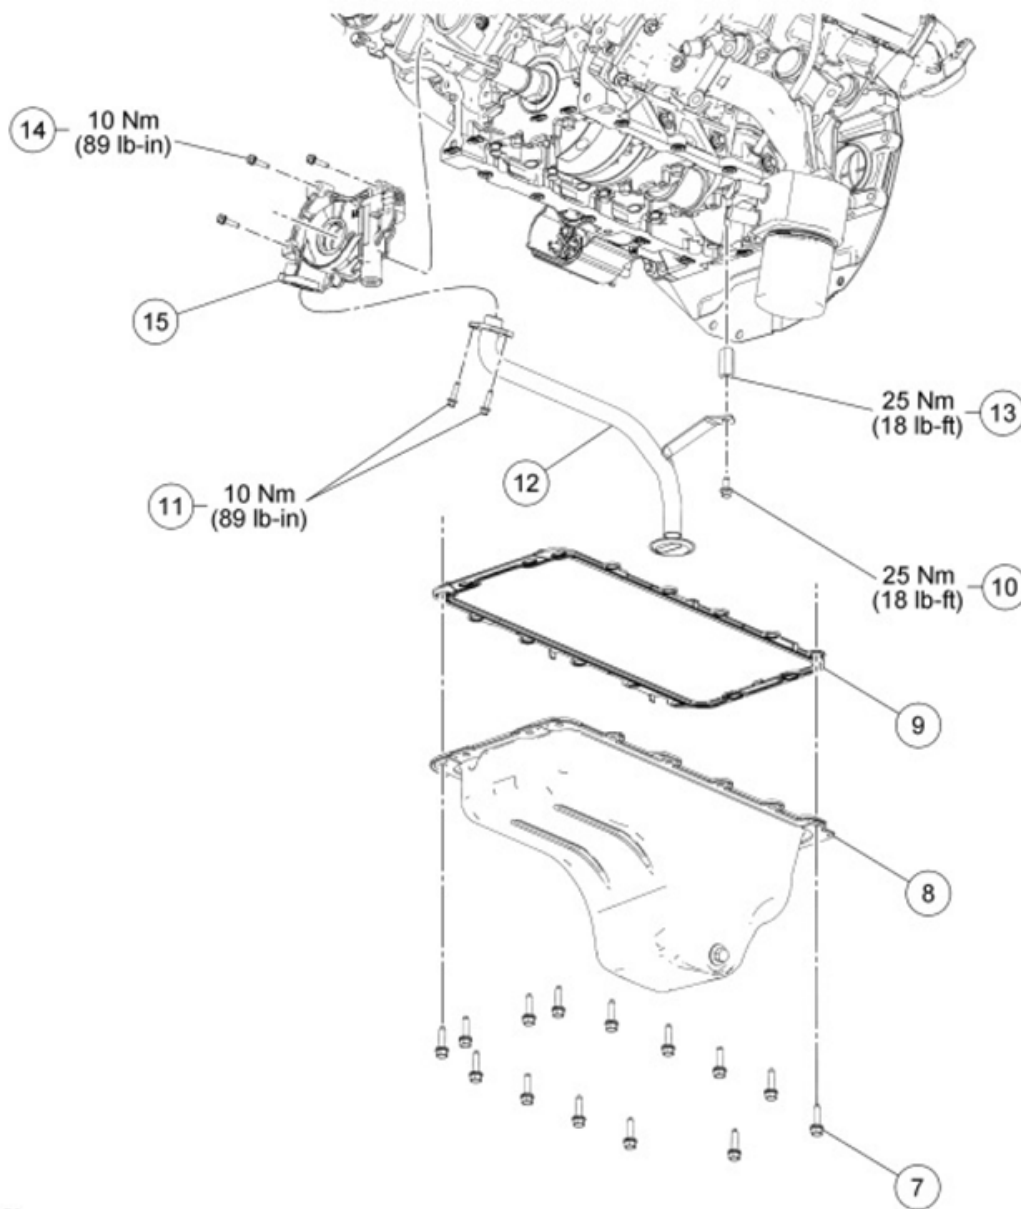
Exploded View Of Engine Lubrication Components With Torque Specifications (1 Of 2)
